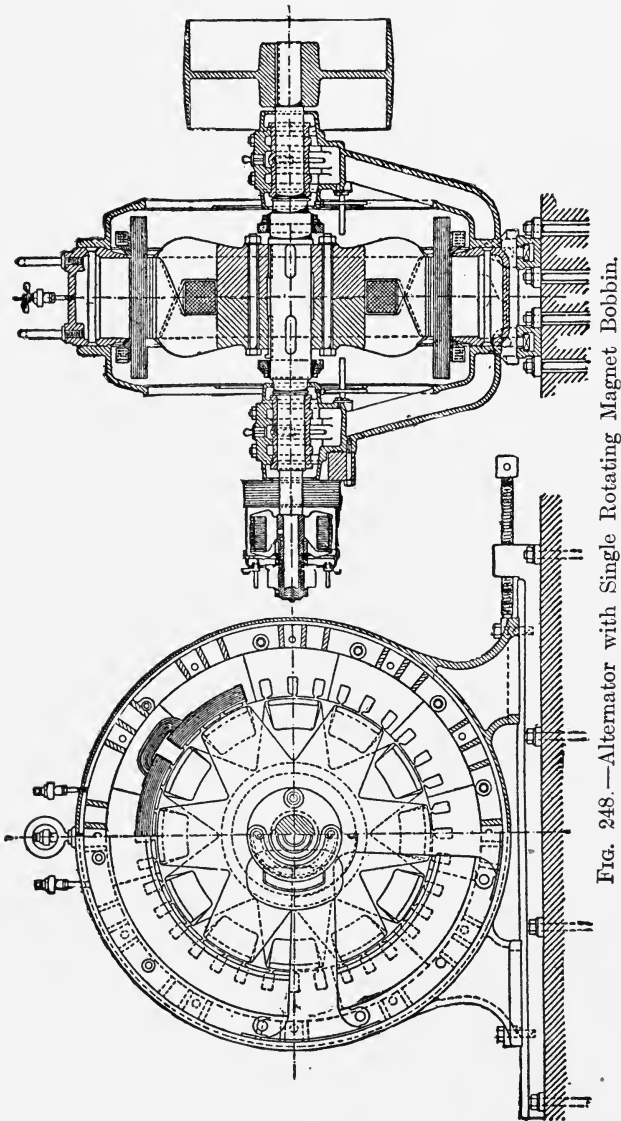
Alternator with Single Rotating Magnet Bobbin.
